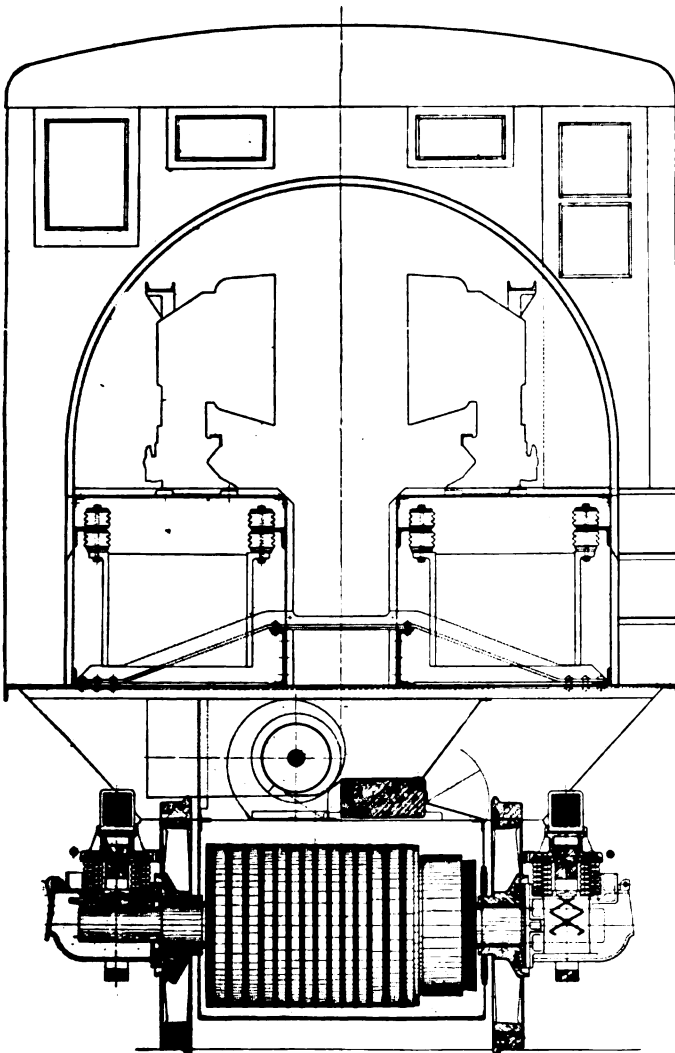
END ELEVATION SHOWING MOTOR-LINE DRAWING—C., M. & St. P. GEARLESS LOCOMOTIVE
